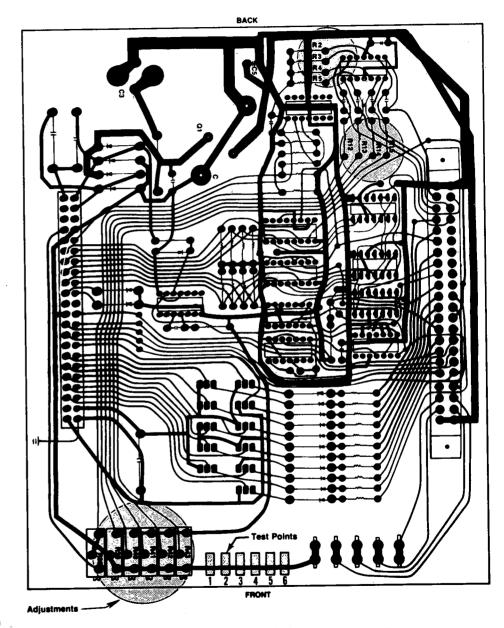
LOCATION OF TEST POINTS ON MOTHER BOARD.
